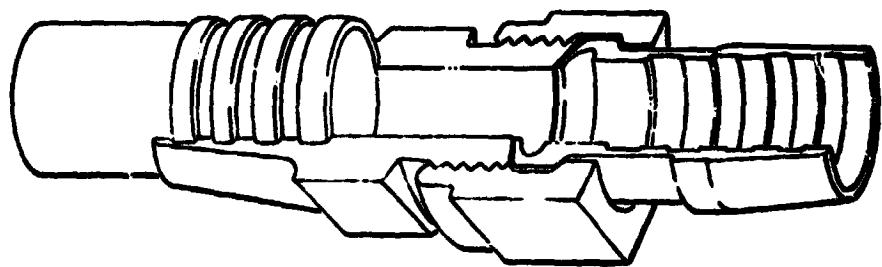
4 inch 304L stainless steel tube with MR54050 TF04 fitting each end.
